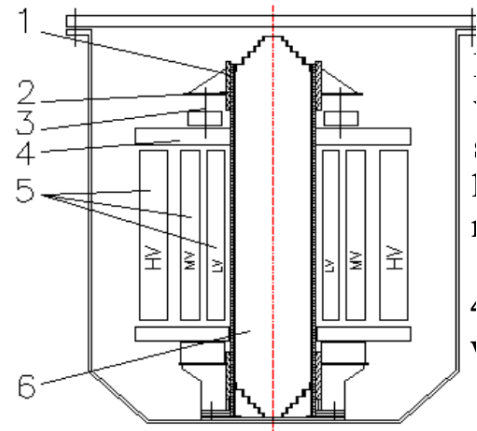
Modeling of winding clamping beam: 1-frame works; 2-tie rod plagues; pressing plate; 4-clamping beam; 5-LV, HV and MV windings; 6-iron core of transformer [5].
